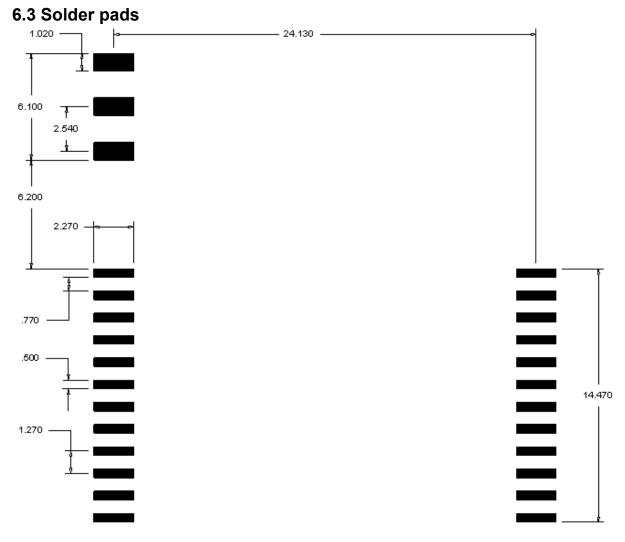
Solder Pads (all dimensions in mm; not to scale)
